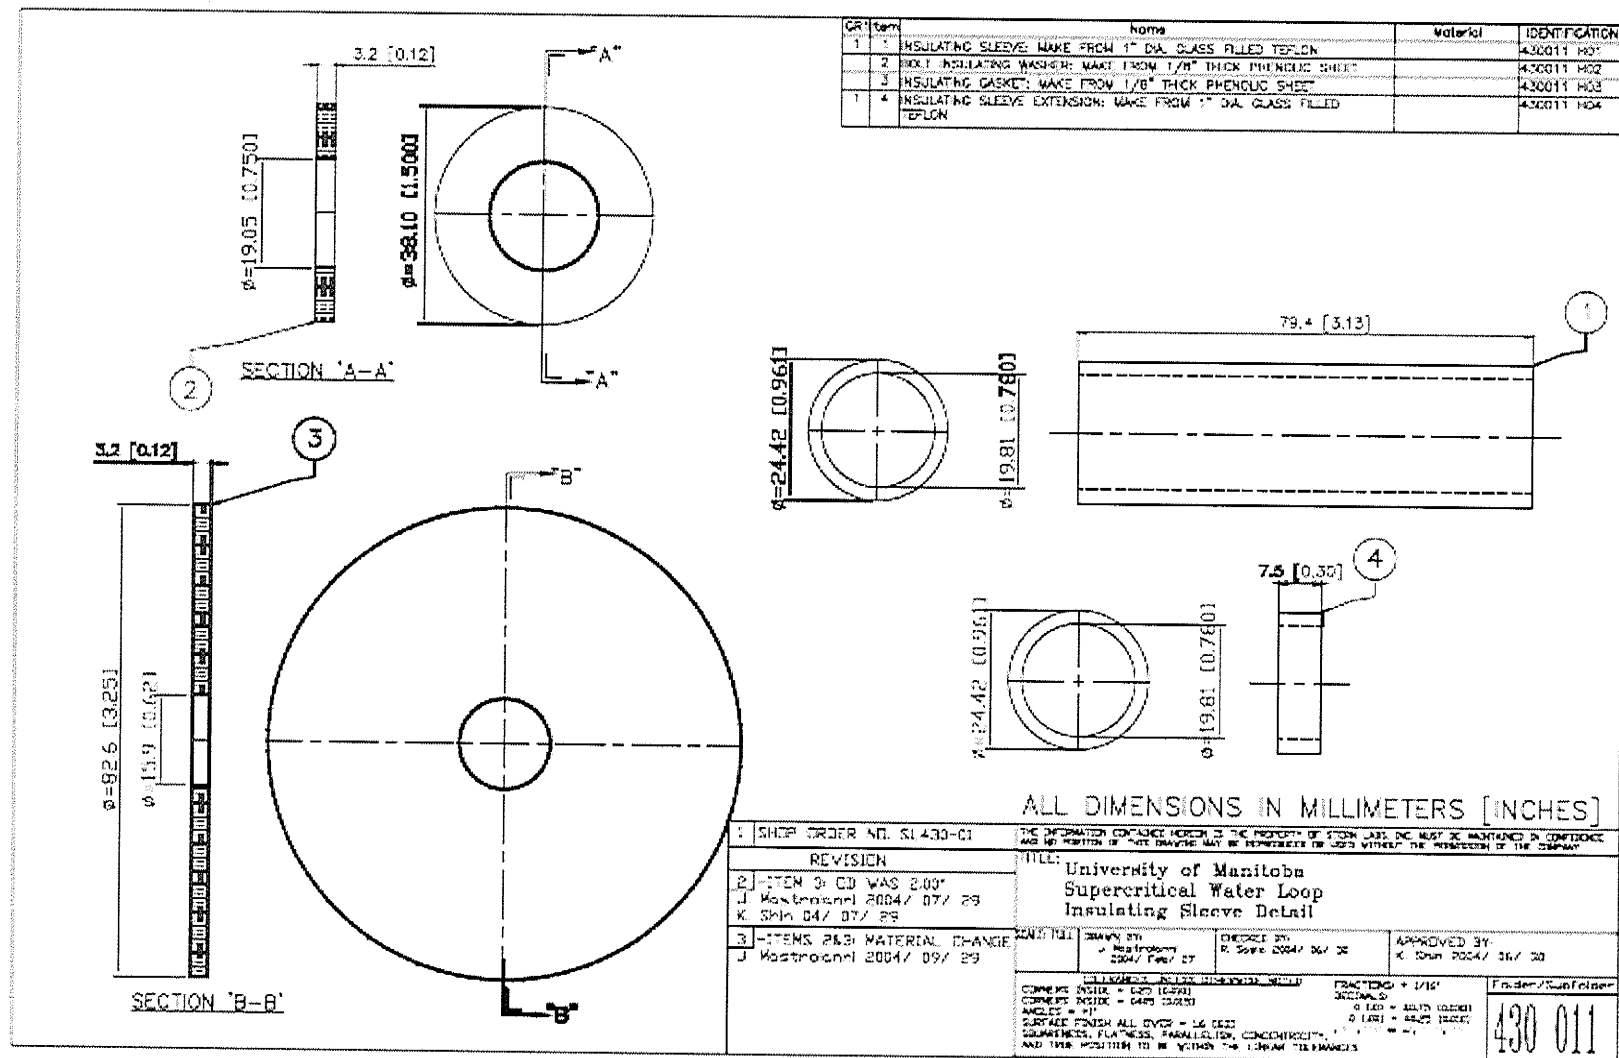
Schematic drawing of test section electrical insulation sleeve details.
